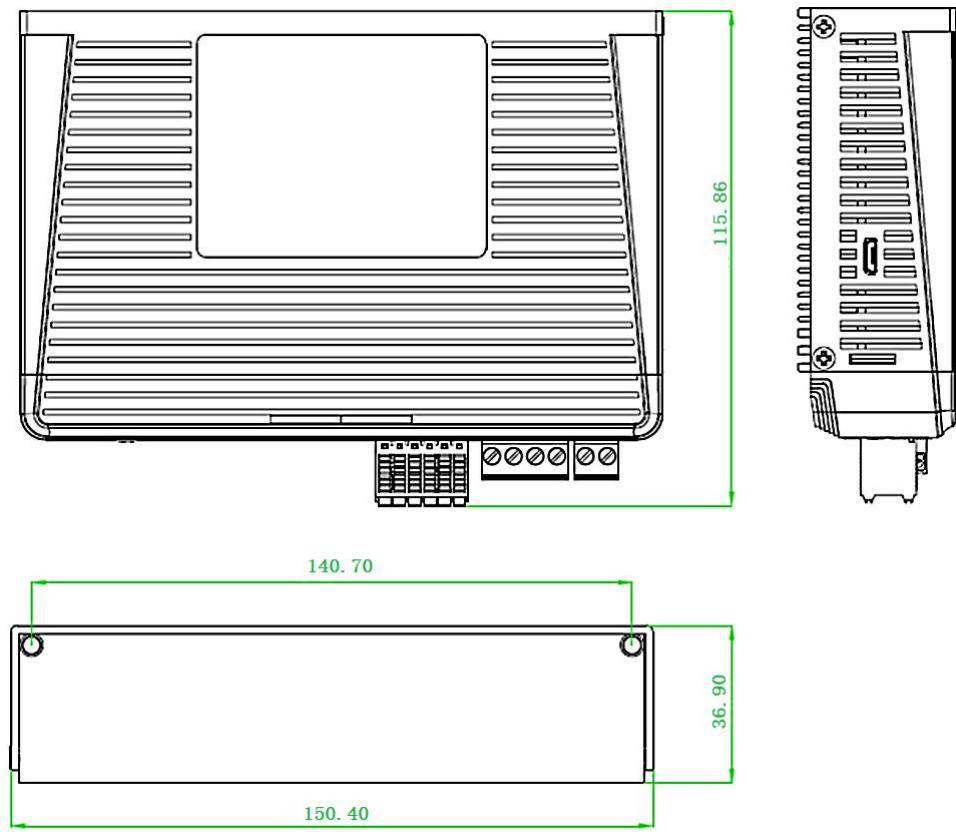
mechanical installation dimension drawing of JMC 2DM880-EC (unit: mm)
